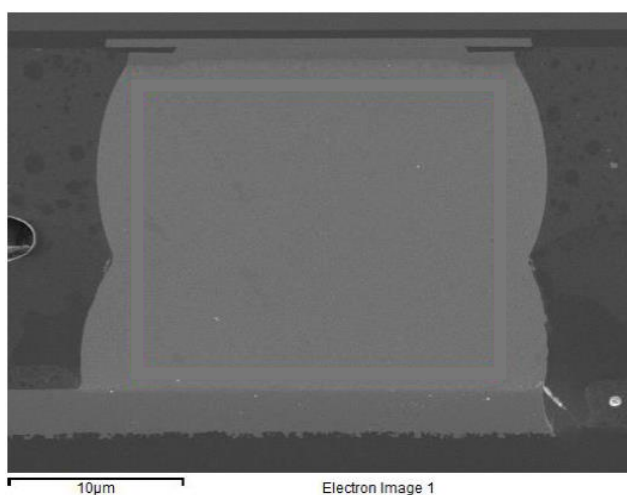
WLCSP solder joint shape with front-side mold ball support structure post-SMT board assembly.
